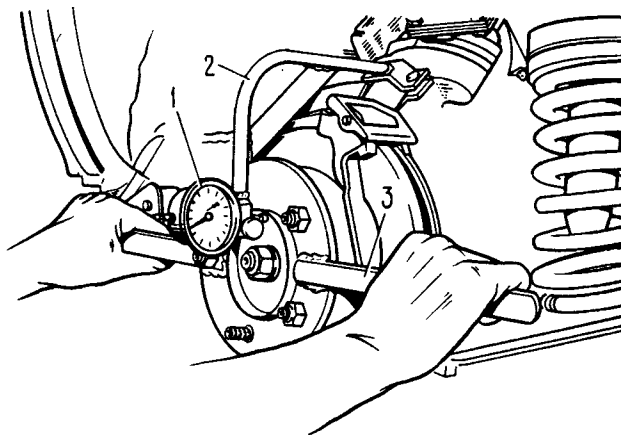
Checking Axial Clearance in Front Wheel Hub Bearings:
